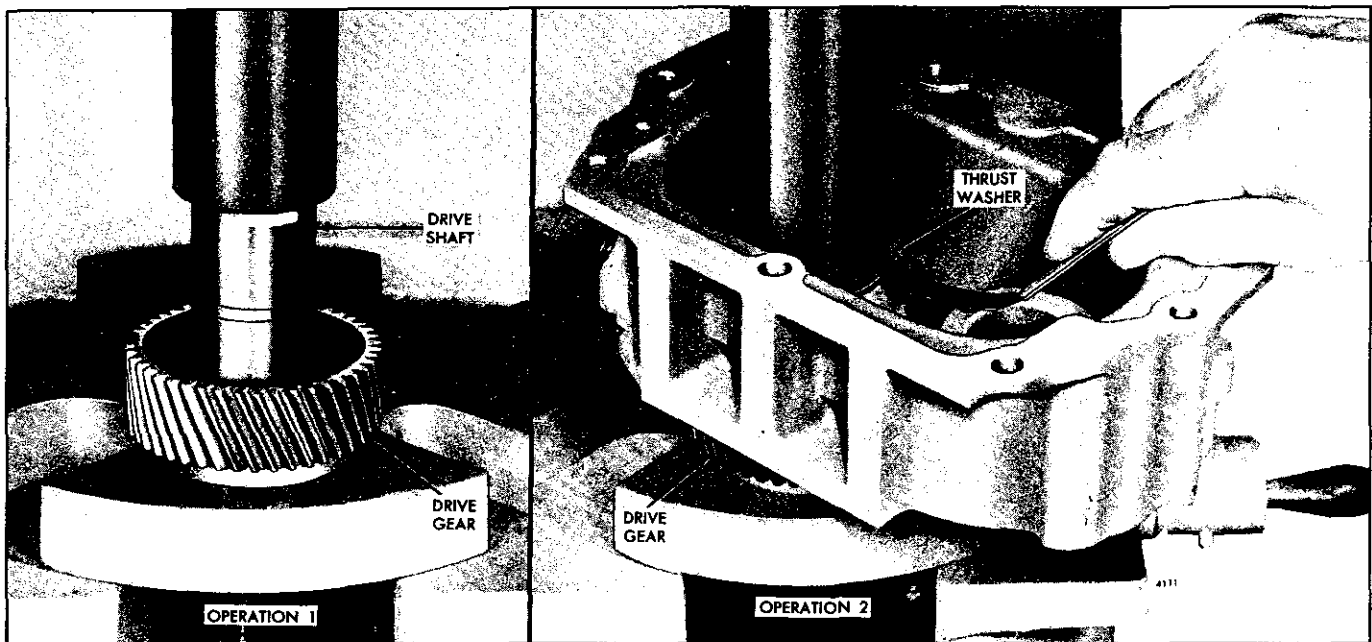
Installing Blower Drive Gear Shaft in Drive Gear
